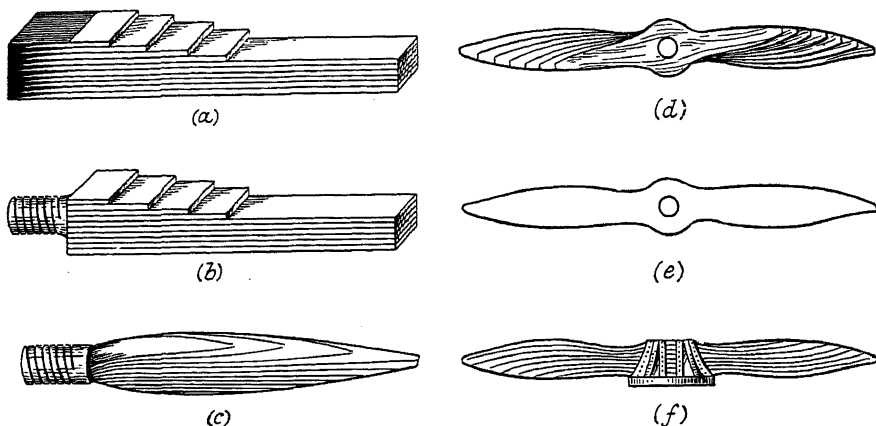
STAGES IN THE MANUFACTURE OF WOODEN AIRSCREWS
